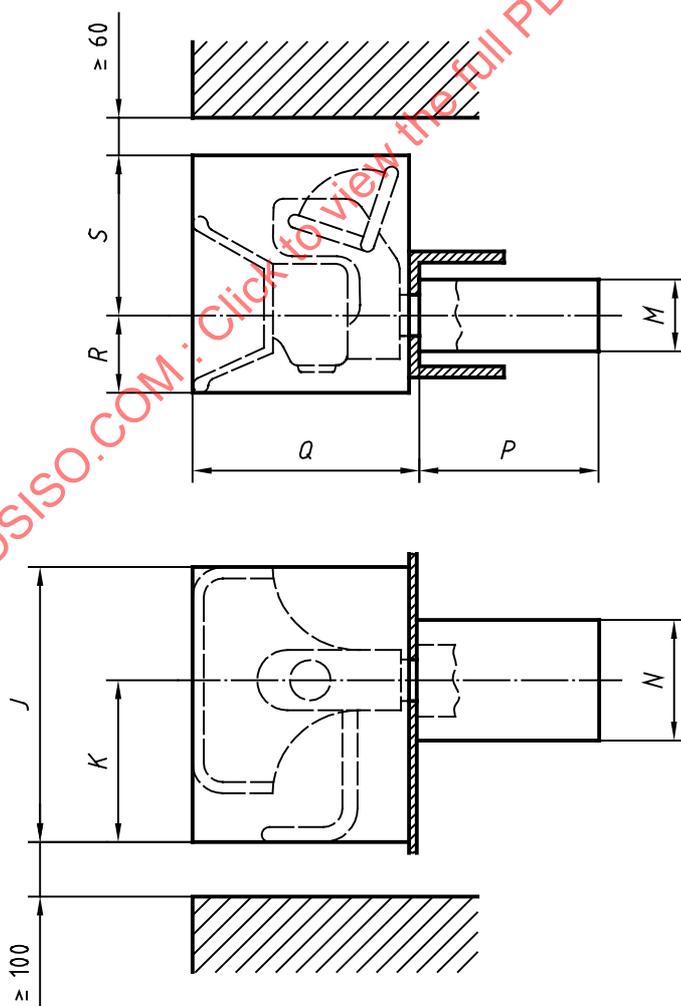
Drawbar coupling envelope box and operating clearance for actuating devices
